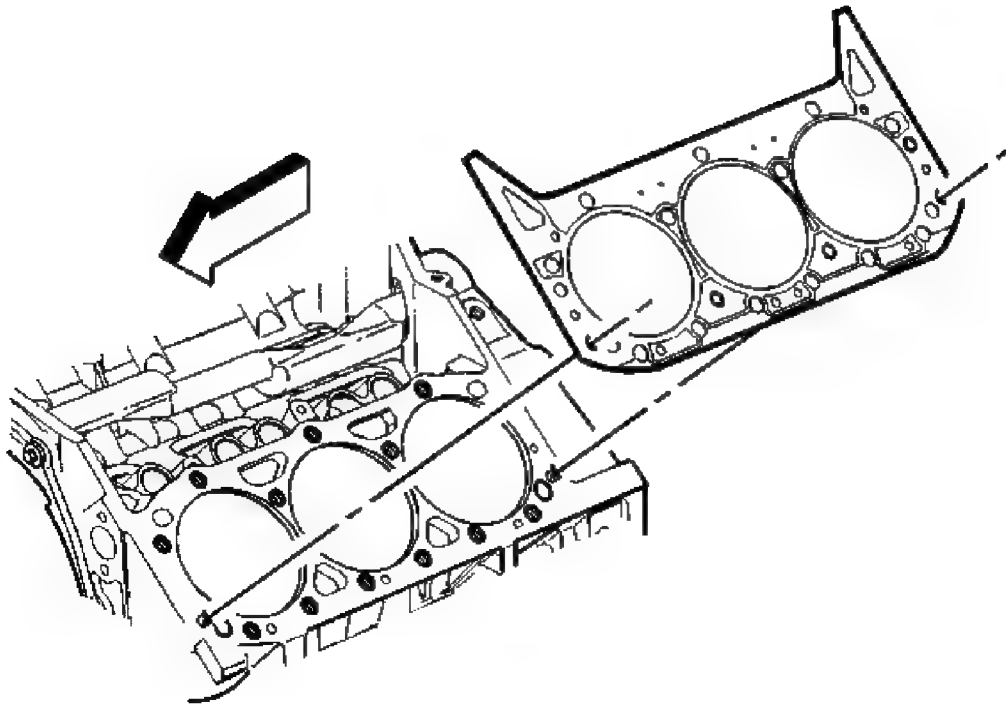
View Of Cylinder Head Gasket And Alignment Pins - Left
